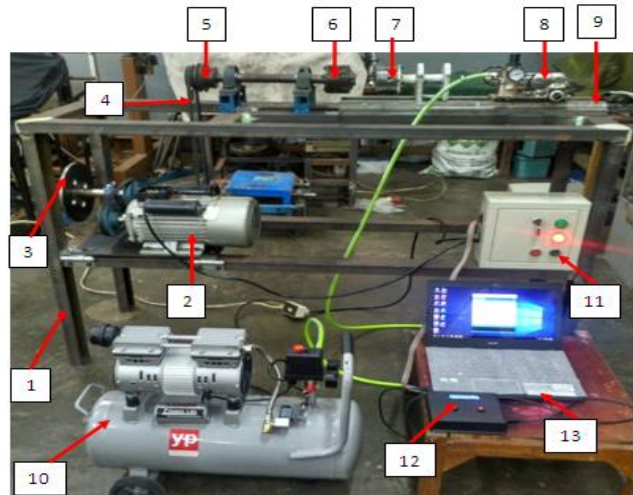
Set Up Rotary Friction Welding (Erikson Siregar,2018)
